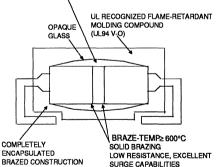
SURFACE MOUNT SUPERECTIFIER PACKAGE
